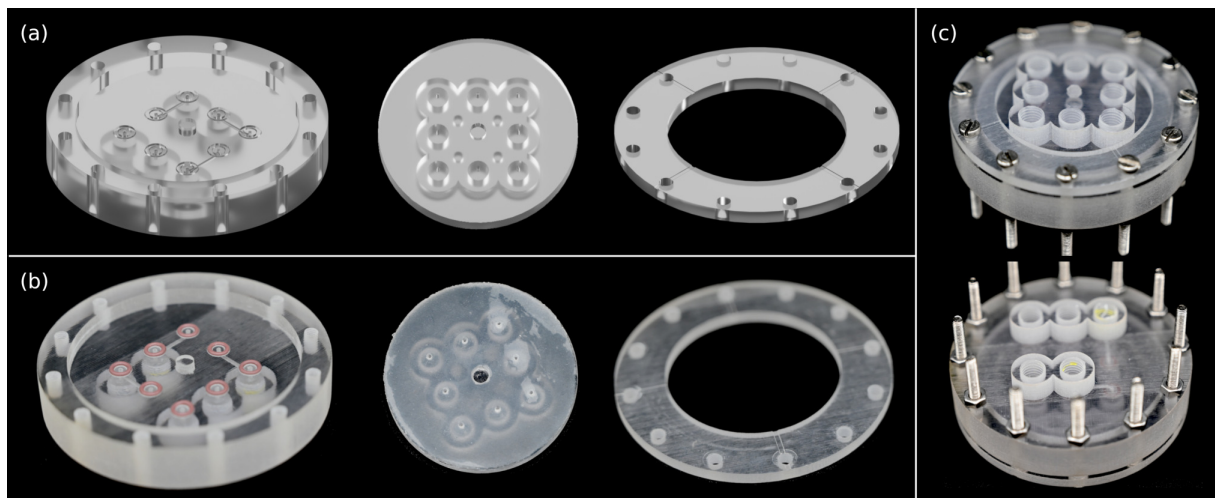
Design and implementation of the upscaled valve: (a) CAD drawing of stator, rotor, and cover; (b) 3D printed rotor, stator, and cover: sealing area of rotor is covered with a silicone mat, and O-rings are placed in respective grooves in stator; parts were printed with polyjetting; (c) top and bottom view of assembled upscaled valve.
